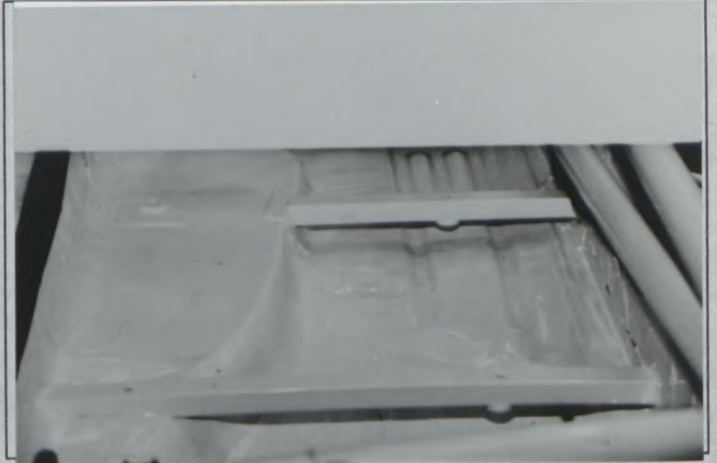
Seat support and anchorages left hand TYPE A
